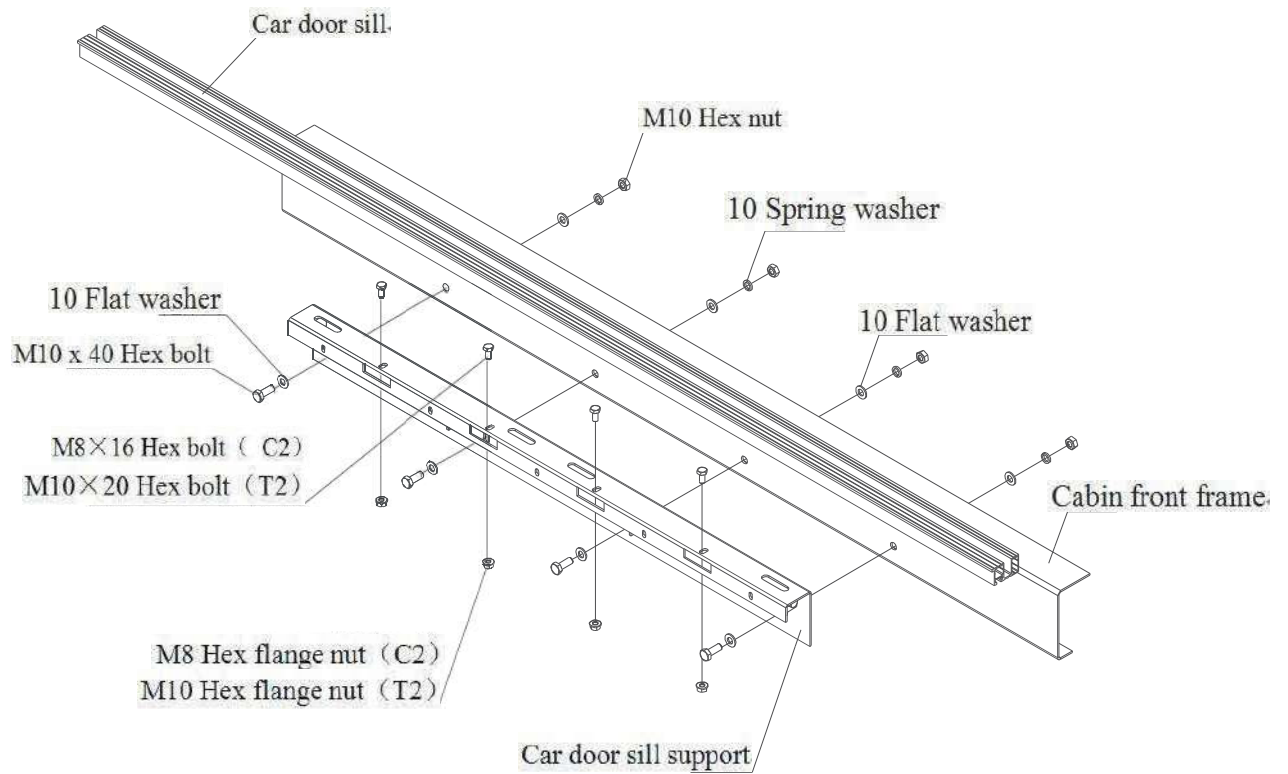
Connection between the car door sill and the sill bracket, and connection between sill bracket and the car front frame
